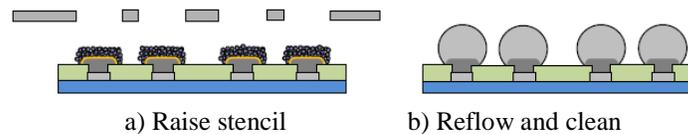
Stencil printing process: a) after removing stencil template, b) quasi-spherical bumps are formed after reflow process. From [Pac Tech-13].
